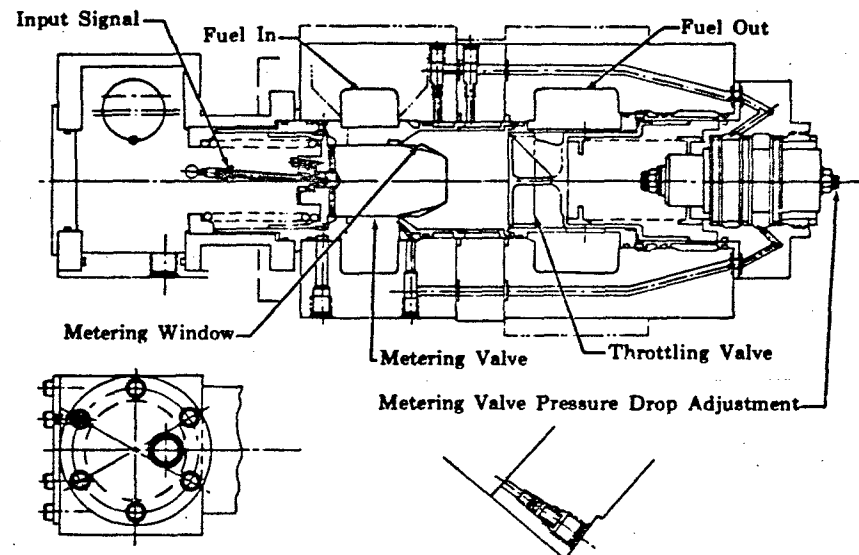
Duct Heater Fuel Metering Valve and Throttling Valve (Unitized Fuel and Area Control - Bendix)
